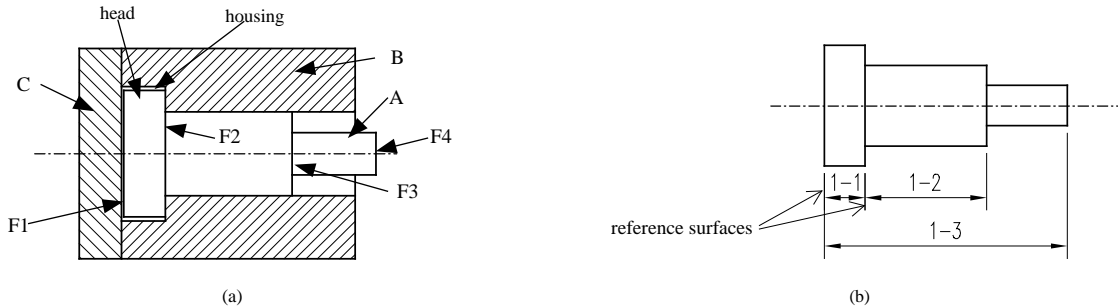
(a) Another example of an assembly; (b) Resulting axial dimensions for part A (Ropion, 1974)
